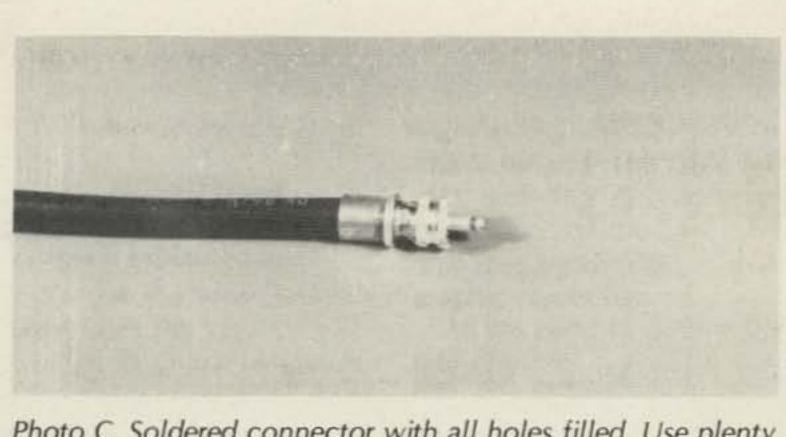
Photo C. Soldered connector with all holes filled. Use plenty of heat.
